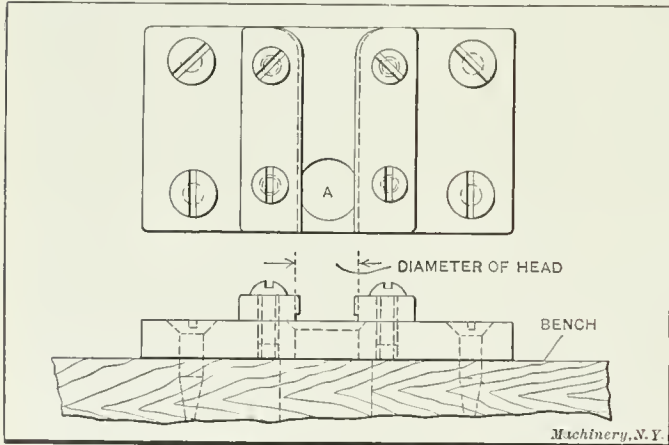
Snap-gage used on the Bench for Gaging the Head of the Shell
